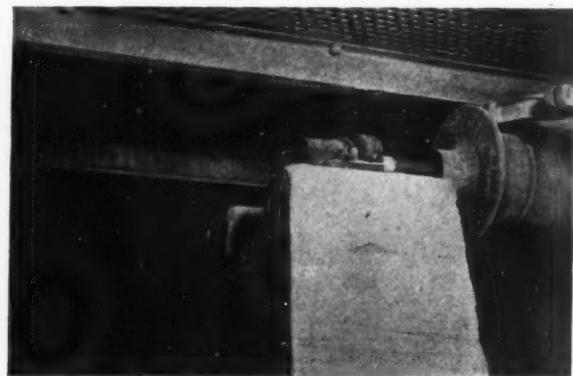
Drag line shaft in cement machinery operates in extremely dusty atmosphere
